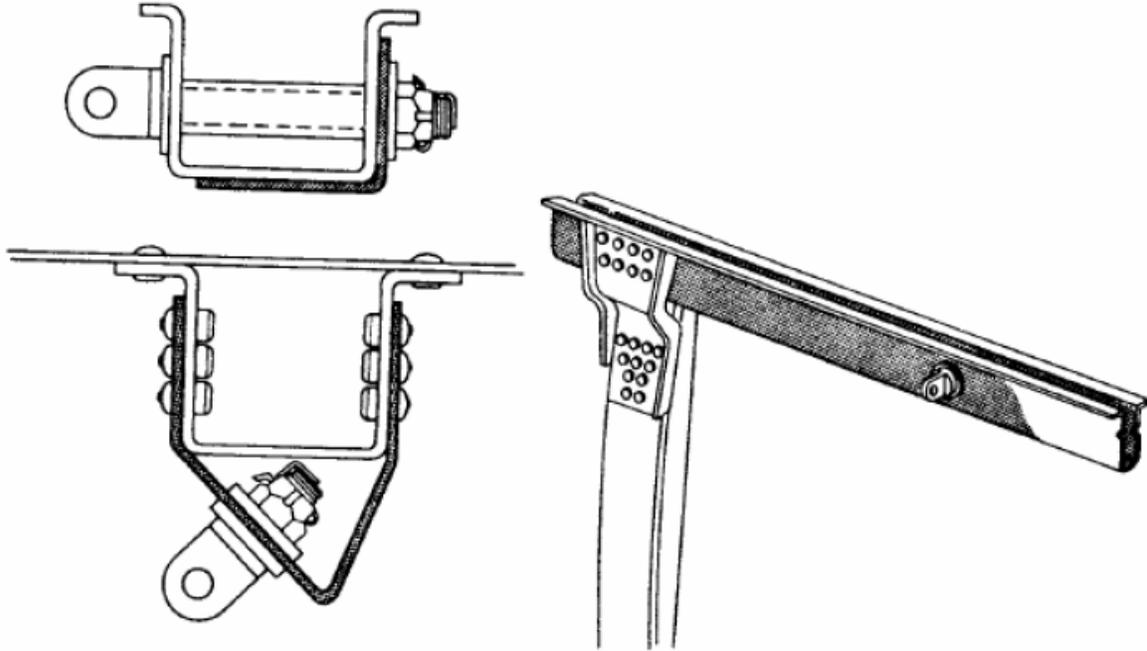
TYPICAL HAT SECTION REINFORCEMENT INSTALLATION
